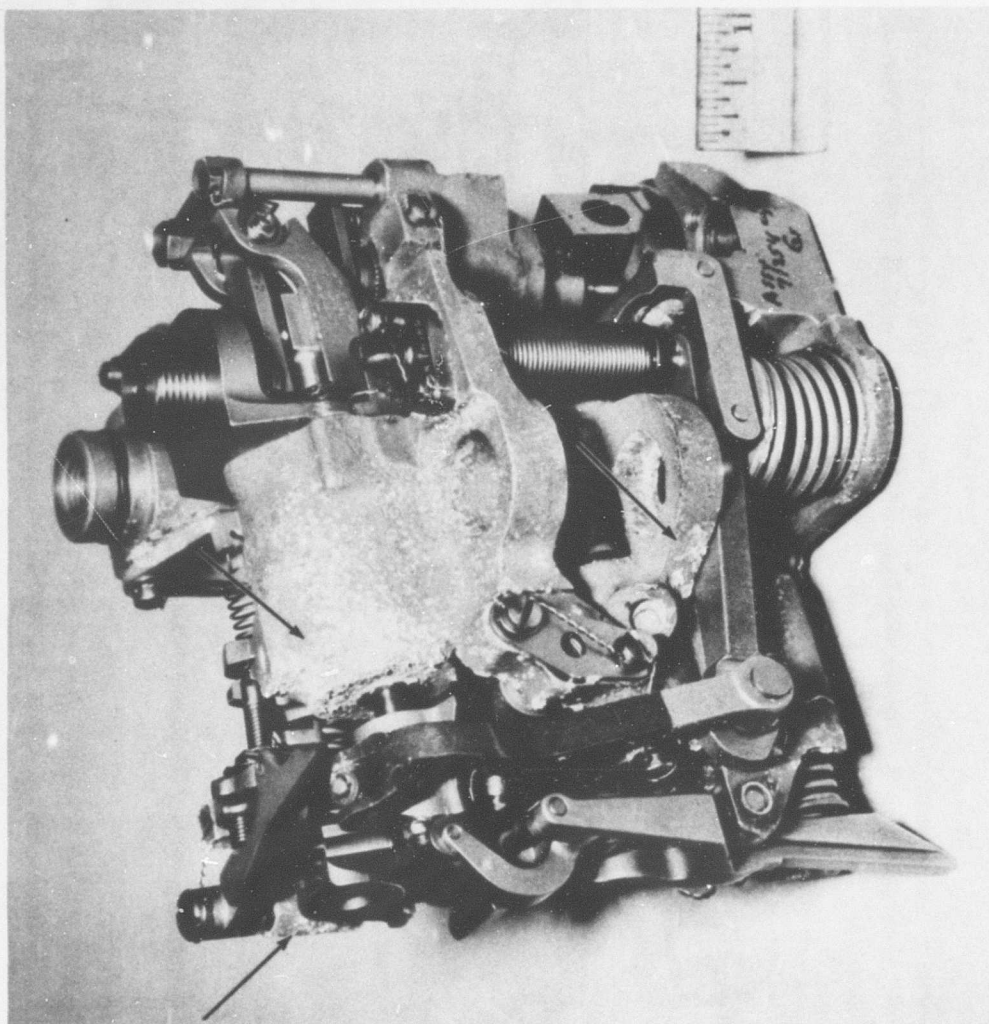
Fuel Control Computer Assembly Removed from Housing; Overall View. (Note corrosion of anodized surfaces.)
